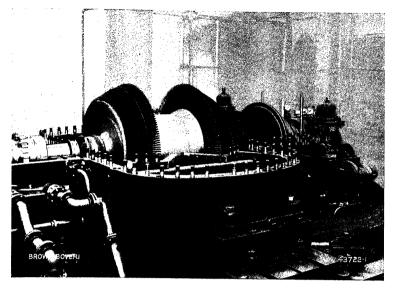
Steam turbine with upper part of cylinder raised; on the test bed.
